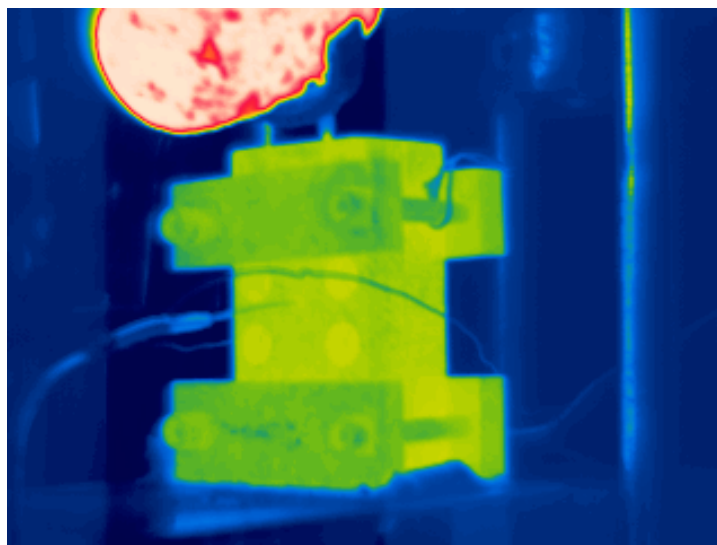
Thermal photo of pouring molten metal into the die cavity
